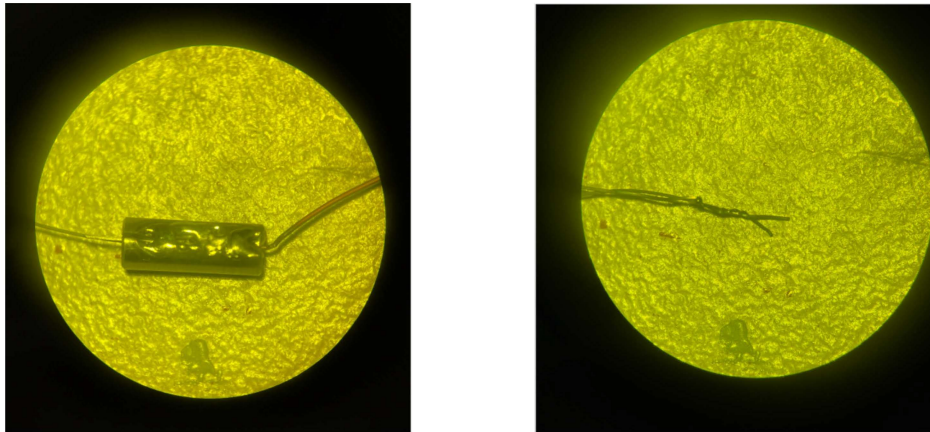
Pictures of the superconducting joints taken under a microscope. (Left) The joint is produced inside a small cylinder. For this, the wires are placed inside a small slit in the cylinder. (Right) The joint is produced by welding the two wires directly together. One can see the twisted wires and the several spot welds.
